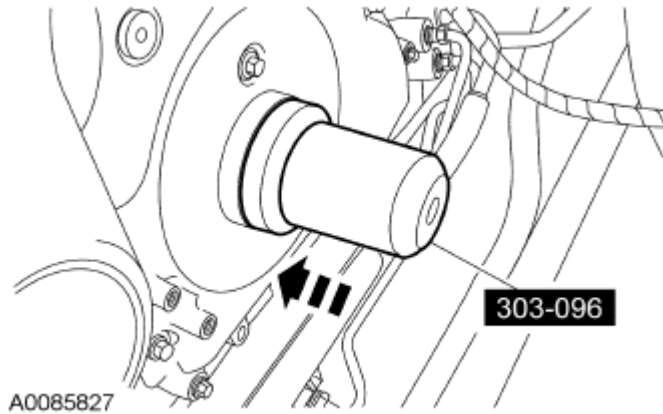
Installing Crankshaft Front Oil Seal Using Camshaft Front Oil Seal Installer
